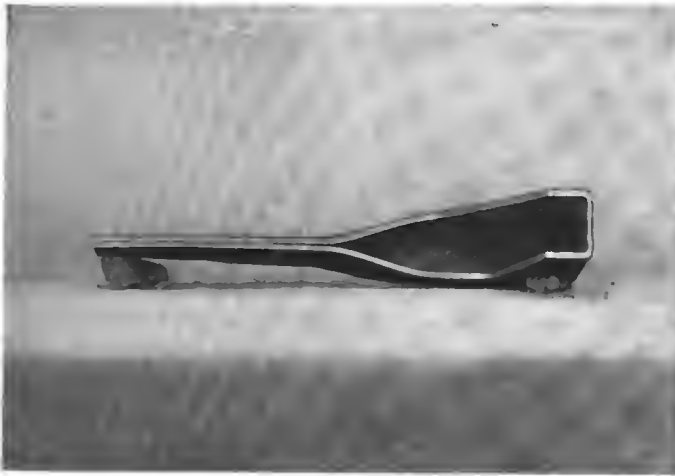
C-46-O Krupp steel chassis frame cross member. Physical properties: T. S., 114,645; E. L., 93,167; Ex-2°, 17%; cold bending test, 180° and flatten down without sign of fracture.
